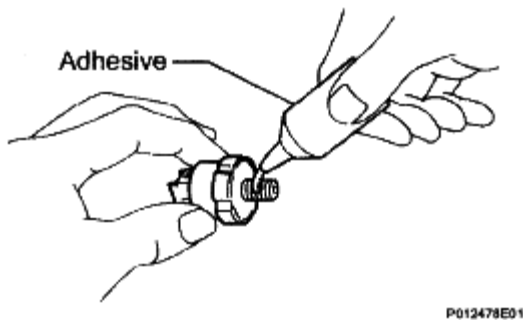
Applying Adhesive On Threads Of Oil Pressure Switch
